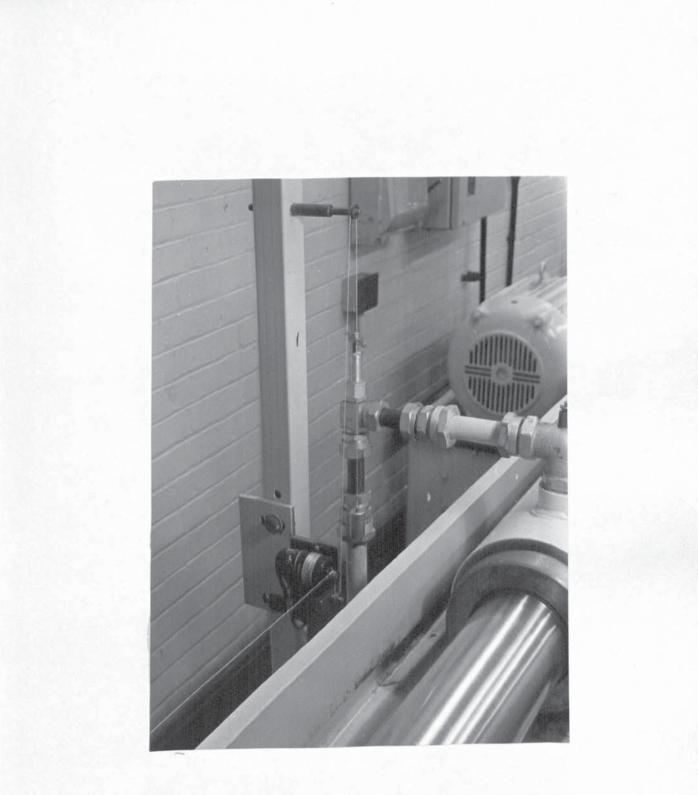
ARRANGEMENT OF DRIVE TO DRAWING-SPEED TACHOGENERATOR
